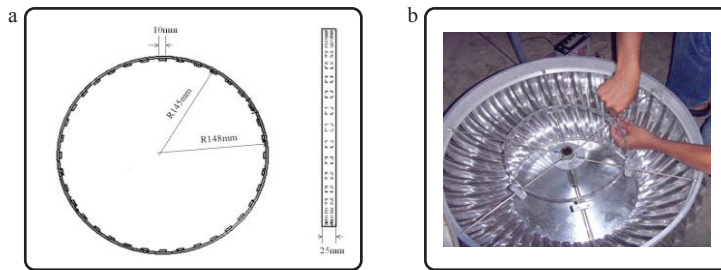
(a) Design of rotor; (b) Prototype of rotor.
